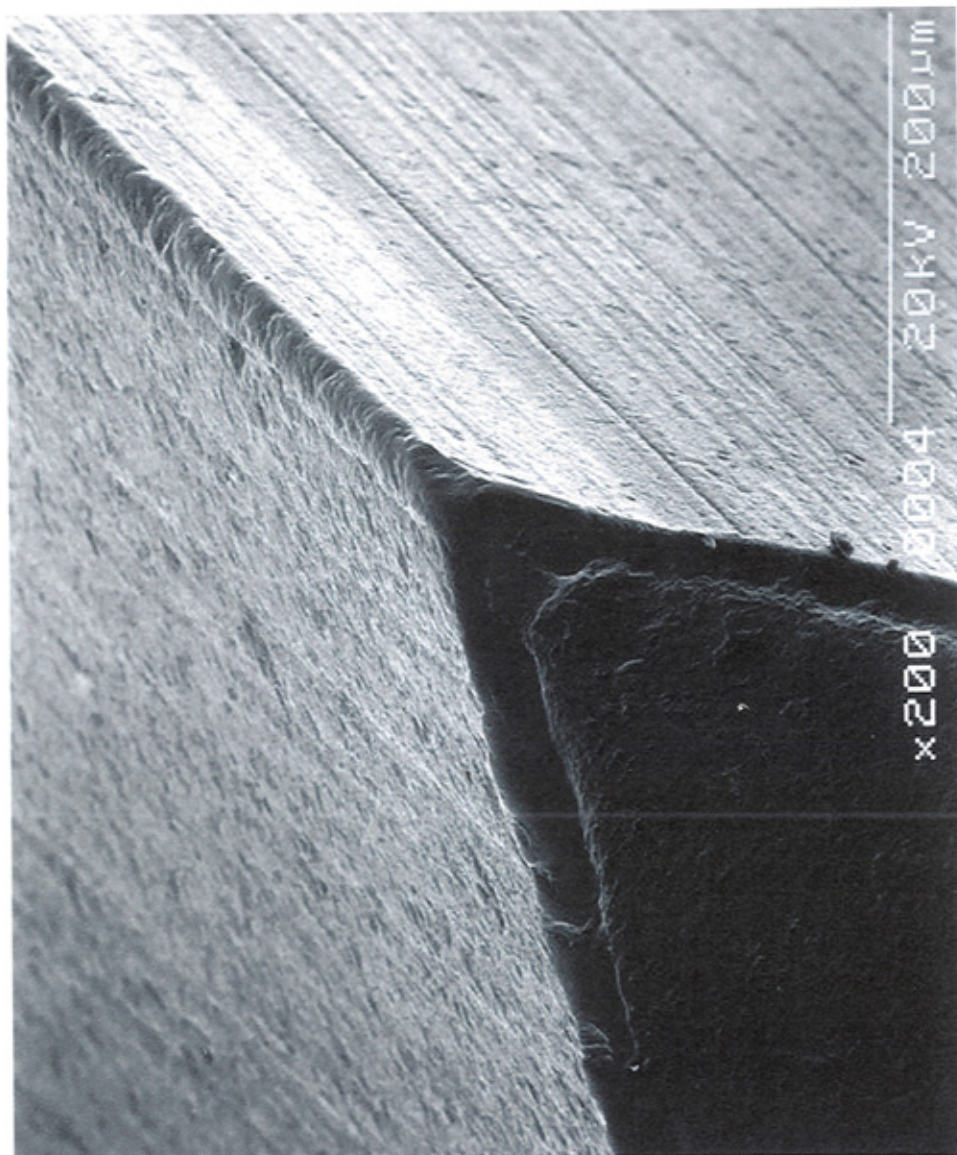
Cutting edge of saw tooth samples used in single tooth tests
